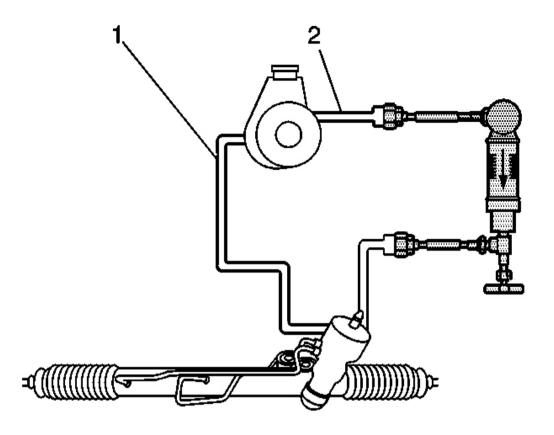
Rack And Pinion System Component View Courtesy of GENERAL MOTORS CORP.
